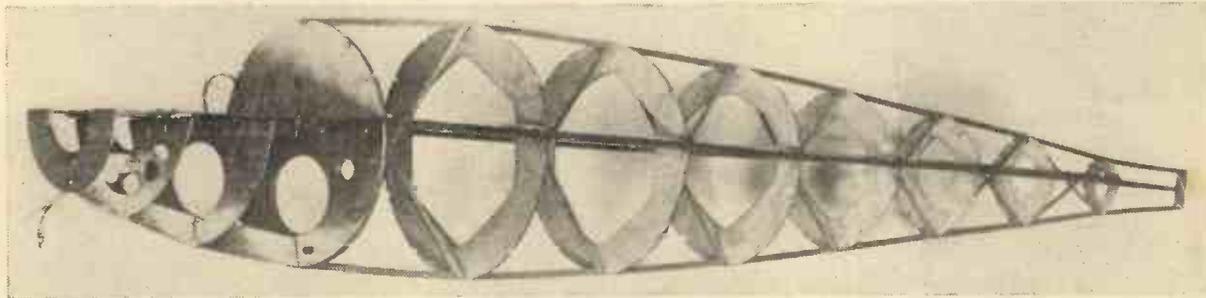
Another view of the partly finished fuselage and engine mounting.
